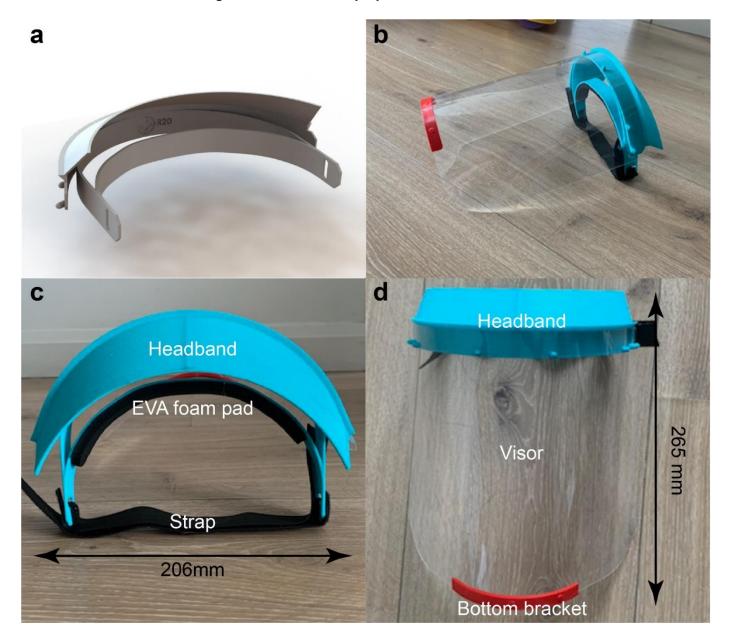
A) Headband CAD image B) final face shield prototype C) headband, foam pad, and hook and loop strap image with dimensions D) headband, visor, and bottom bracket image with dimensions.
